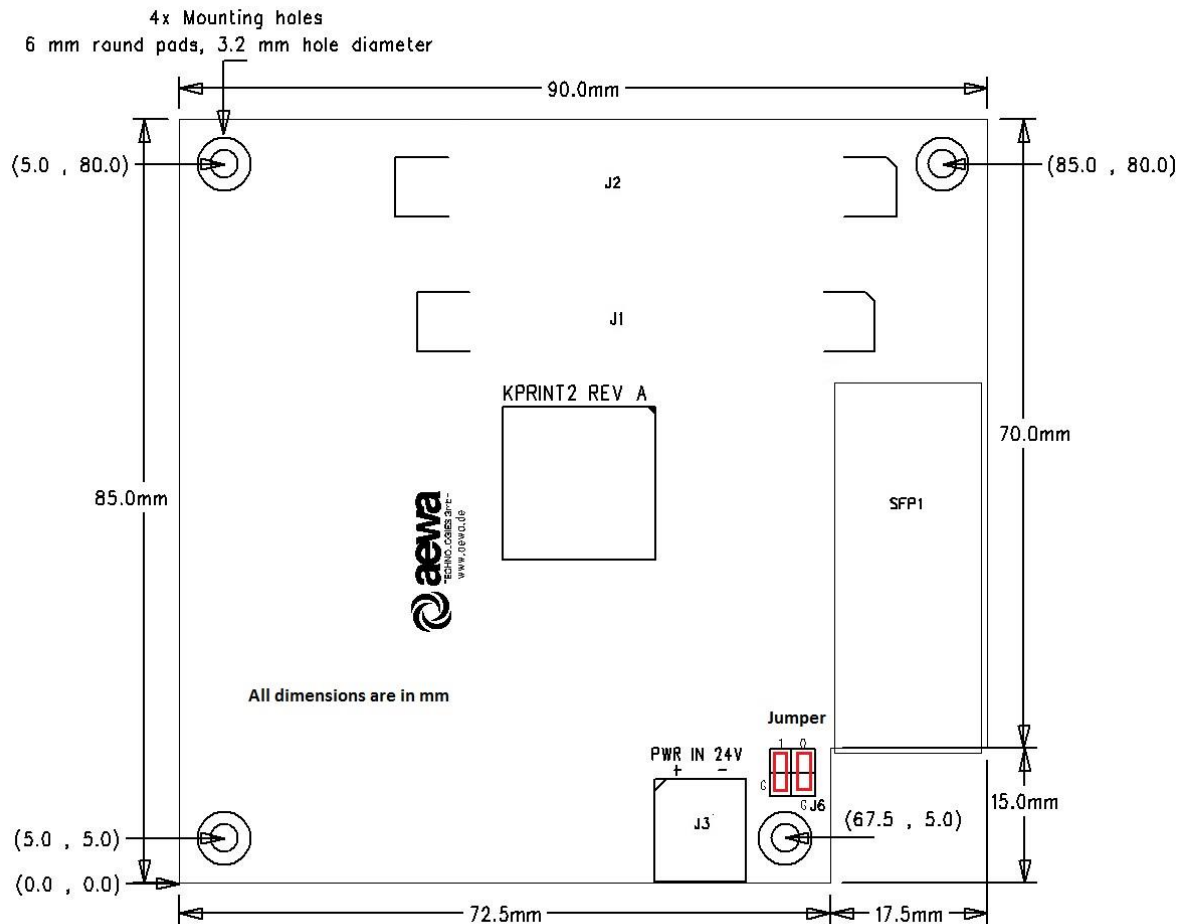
KPRINT2 MECHANICAL DIMENSIONS
